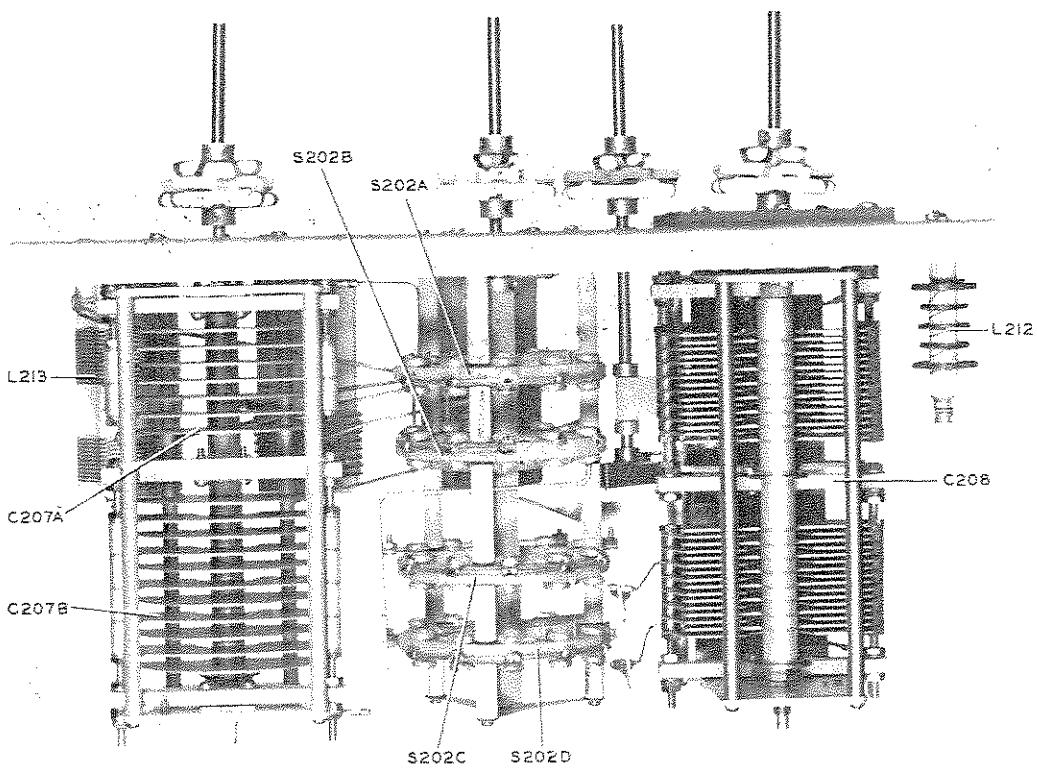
OUTPUT COIL & SWITCH ASSEMBLY, BOTTOM VIEW
